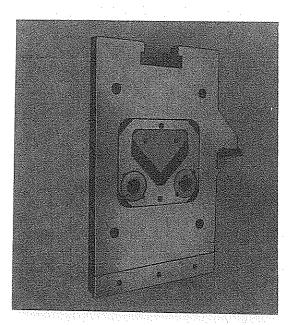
Fixed mounting of the movable sectional steel blade in the section slide
